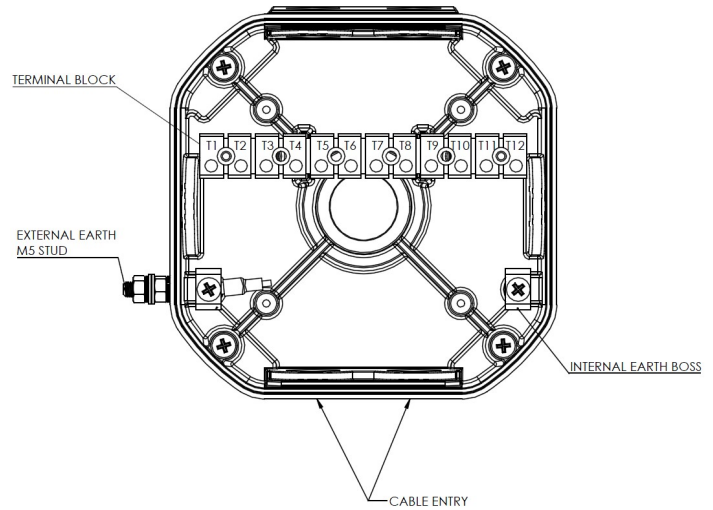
Entry Unit (Beacon 1) Internal Detail & Terminal Block
